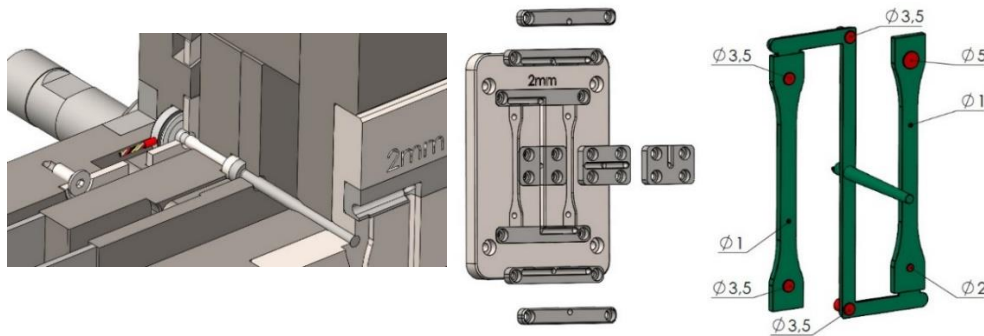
The sensor installation layout on the moving side of the 1BA test specimen tool (left), the interchangeable insert with available gates (center), and the measuring pin dimensions on the stationary side marked on the test specimen (right)
